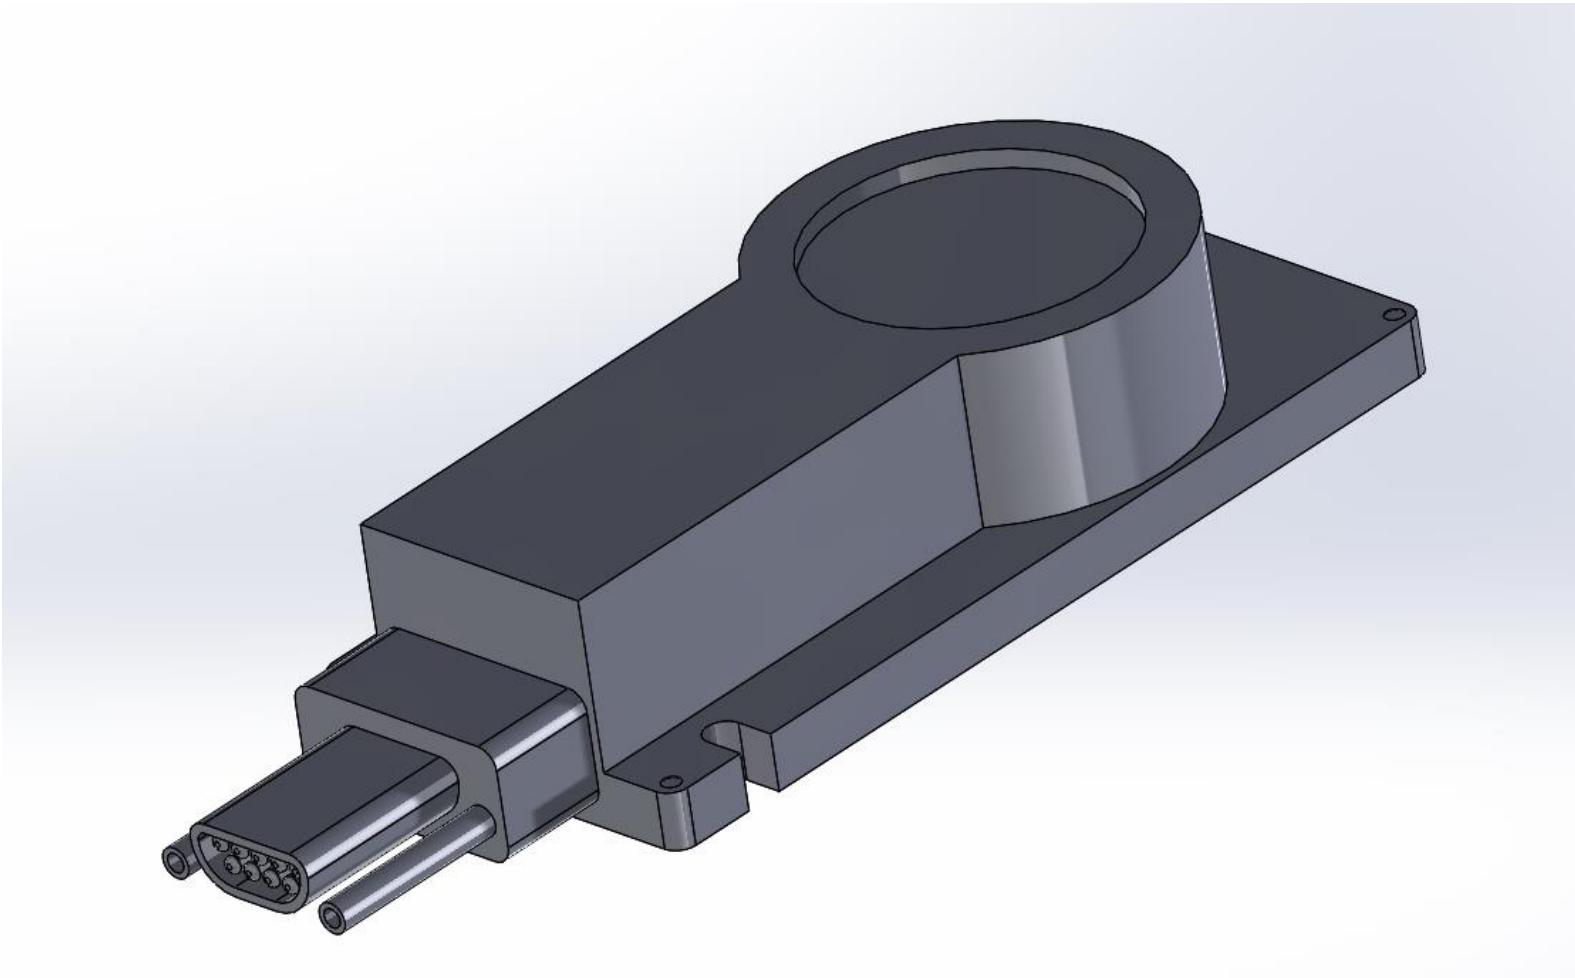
Part 1000 (NSS Fine Sun Sensor) CAD Drawing
